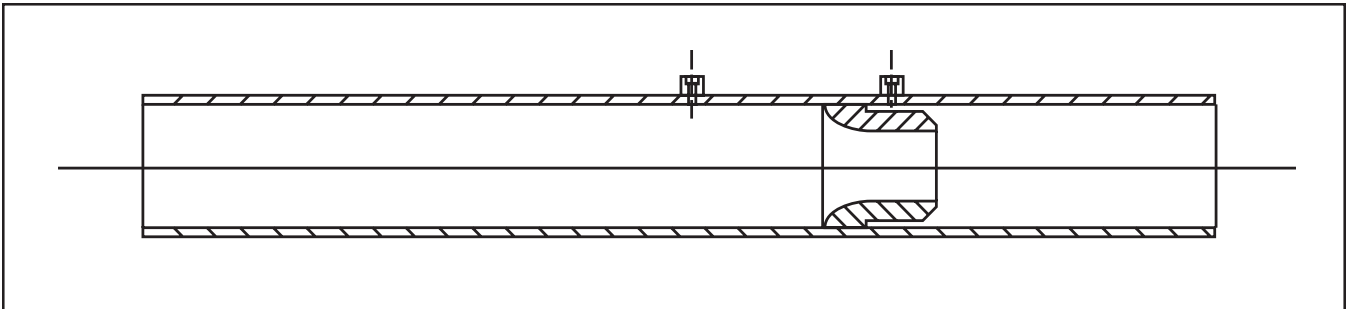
Flow section with weld-in type flow nozzle
